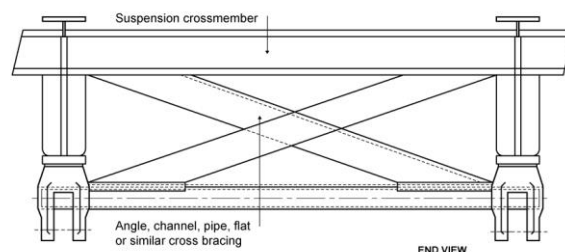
Example of typical chassis cross-bracing at suspension brackets
